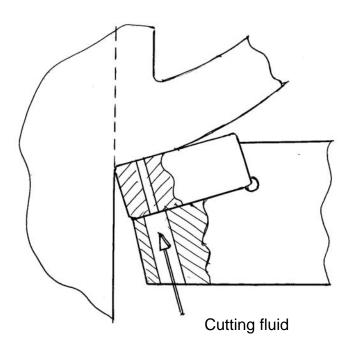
Application of cutting fluid at high pressure through the hole in the tool.
